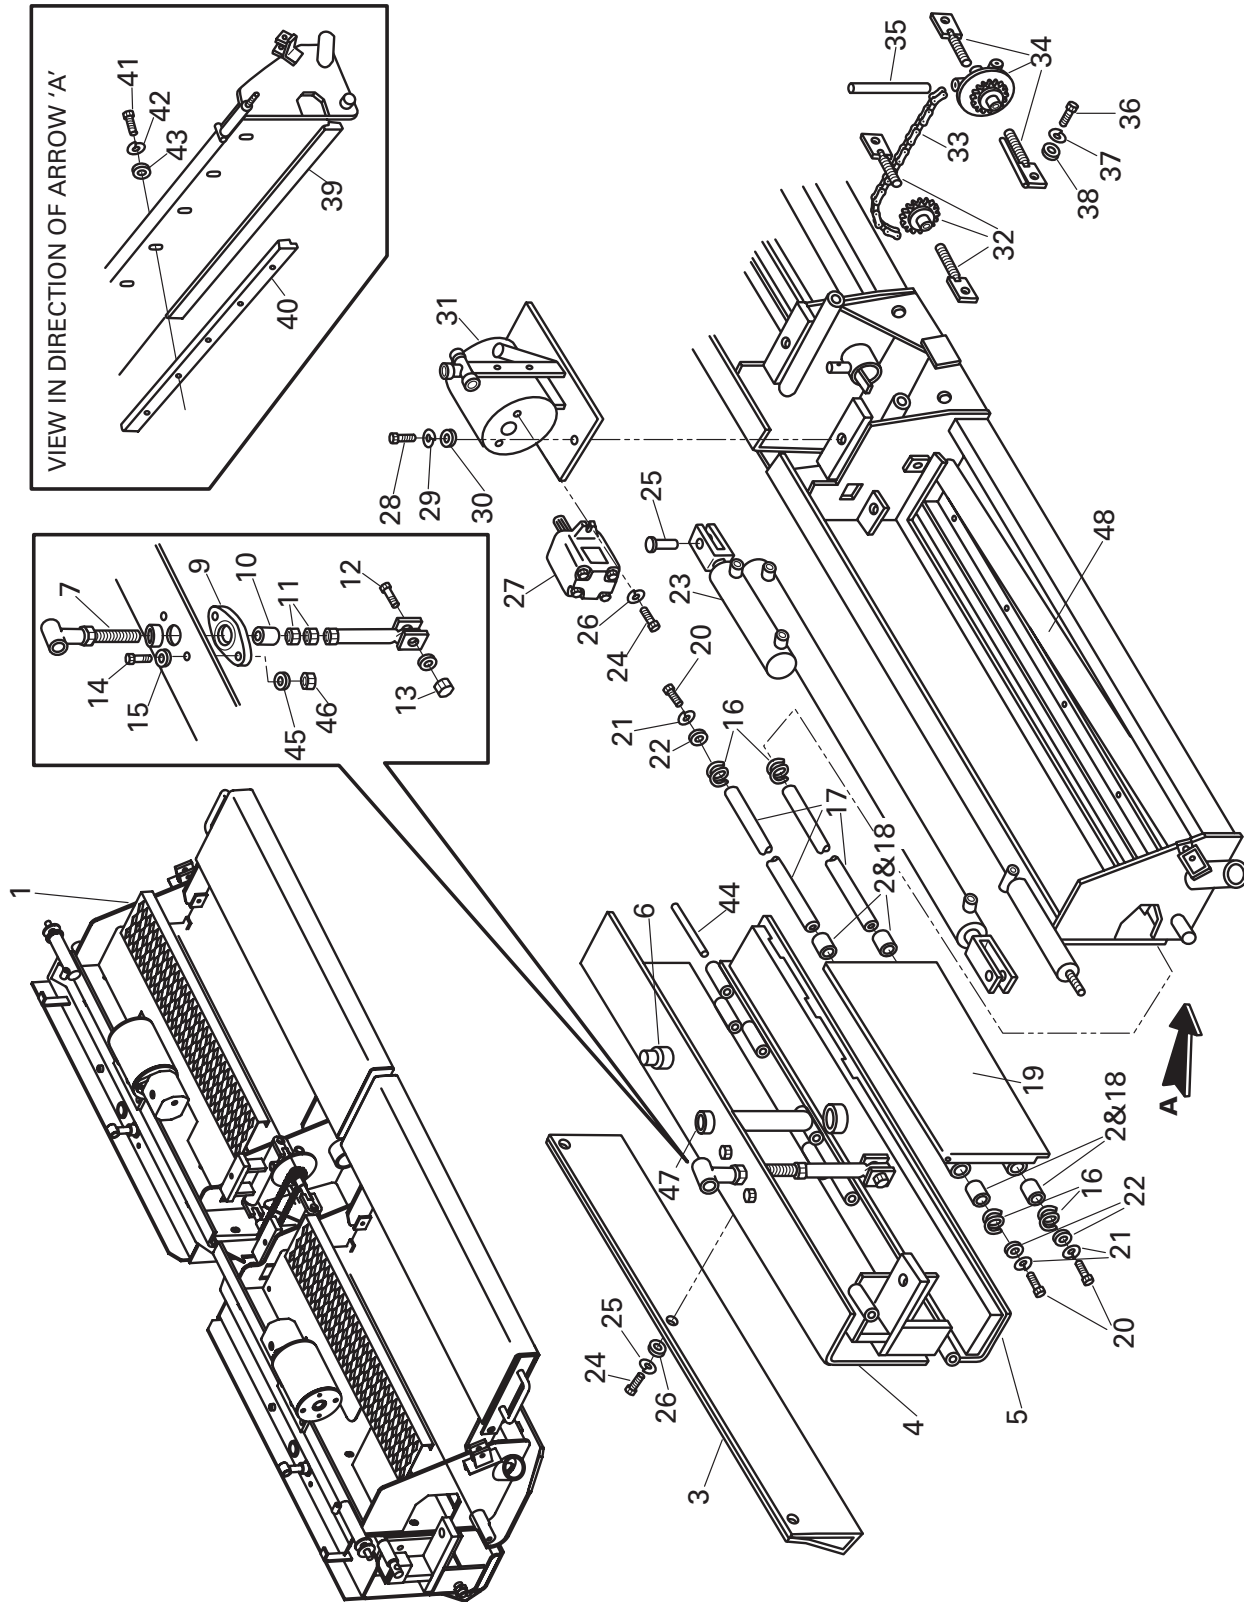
EXPANDABLE SCREED ASSEMBLY (PART I)
